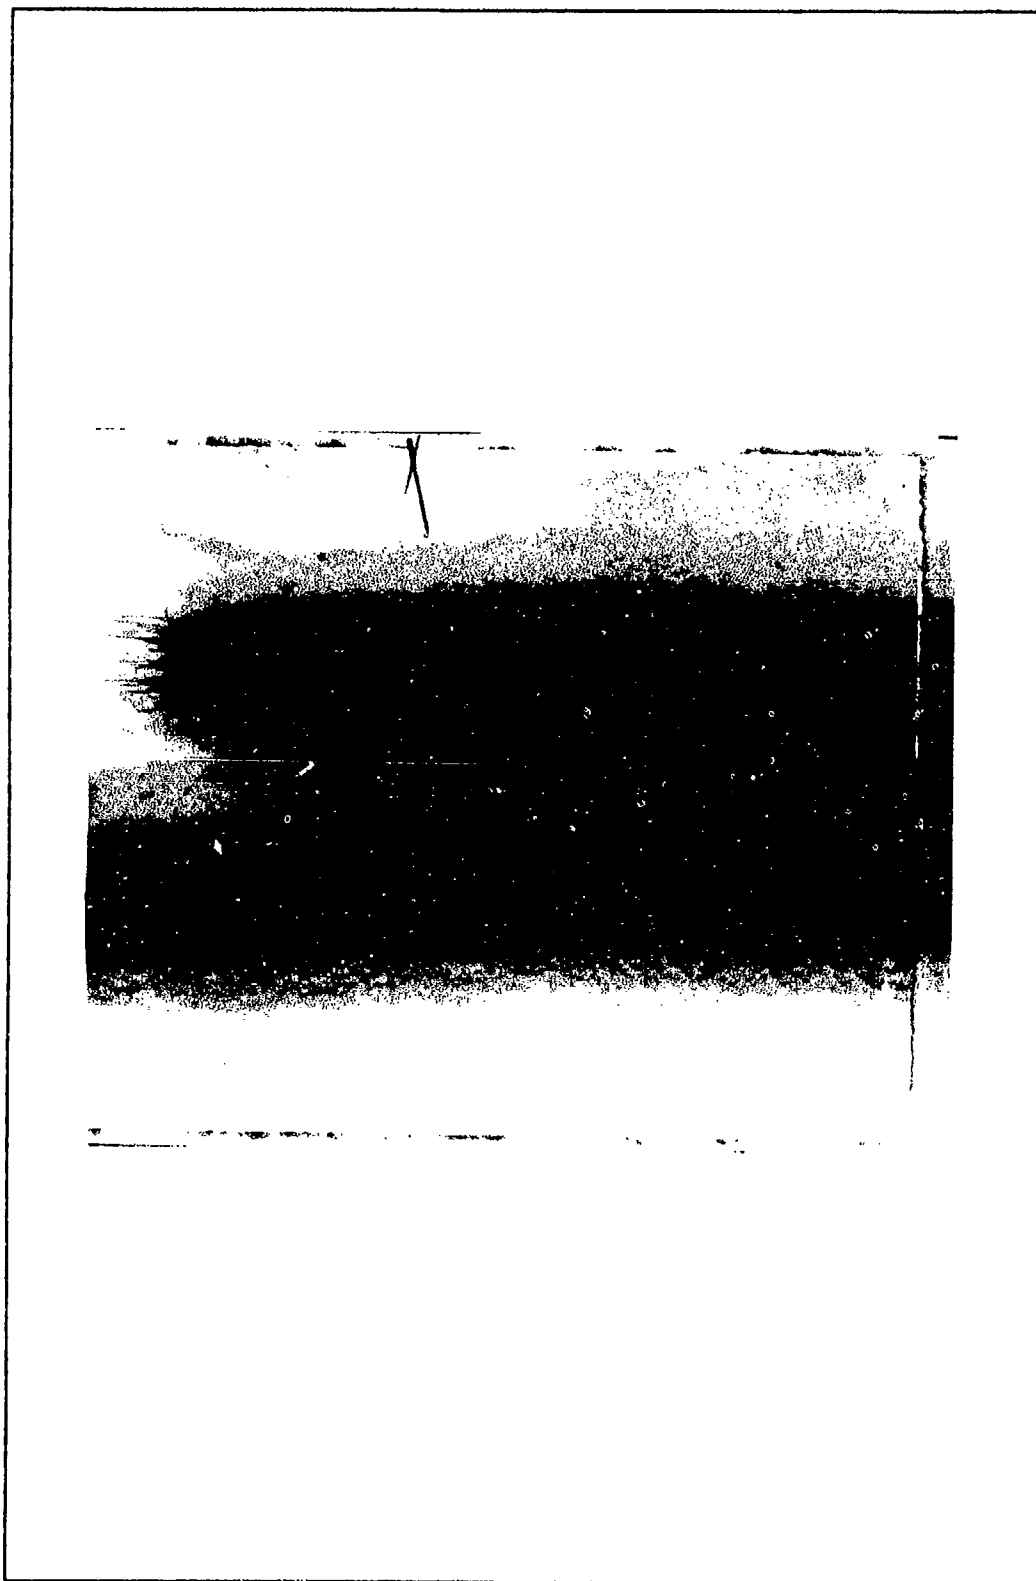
Final Fracture, Specimen 90G0308, 6.3X Mag.
